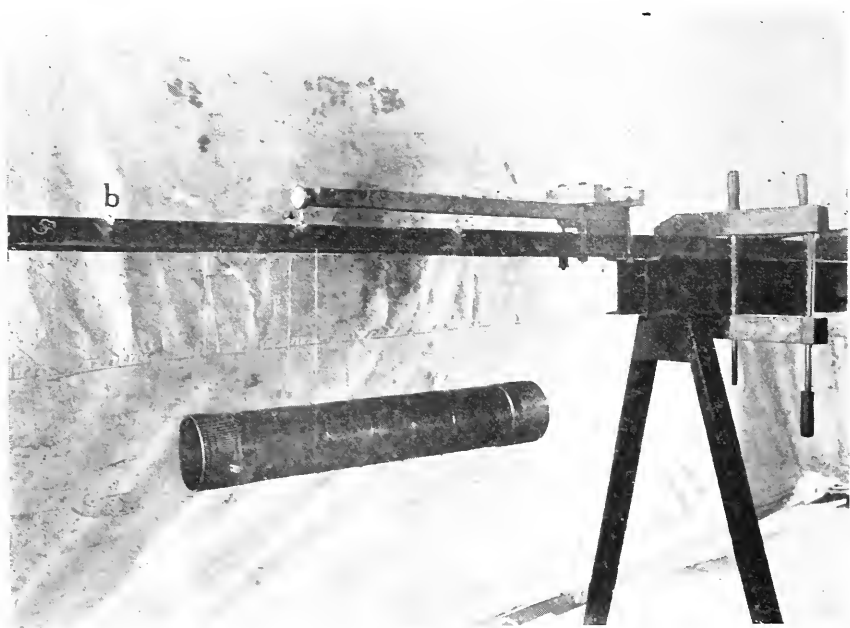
VIEW OF APPARATUS USED IN MEASURING THICKNESS OF TUBE WALLS.
